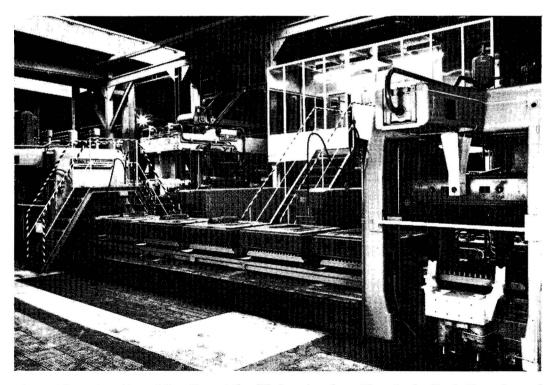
The automatic molding line at the Högfors foundry. The standardized dimensions of the molding boxes are $900 \times 720 \times 300/300$ mm. The maximum molding rate is 180 molds per hour.
